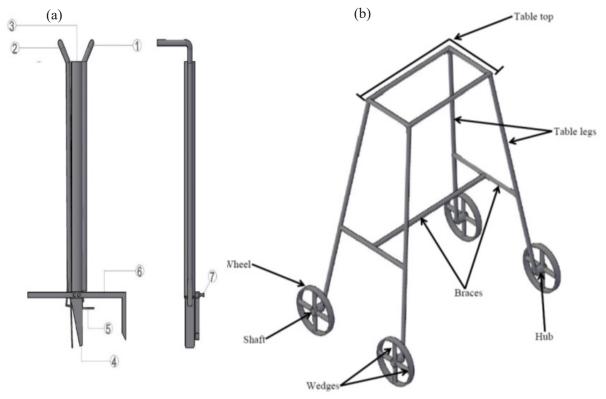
The assembly drawing of the (a) handheld vegetable transplanter and (b) tray holder
